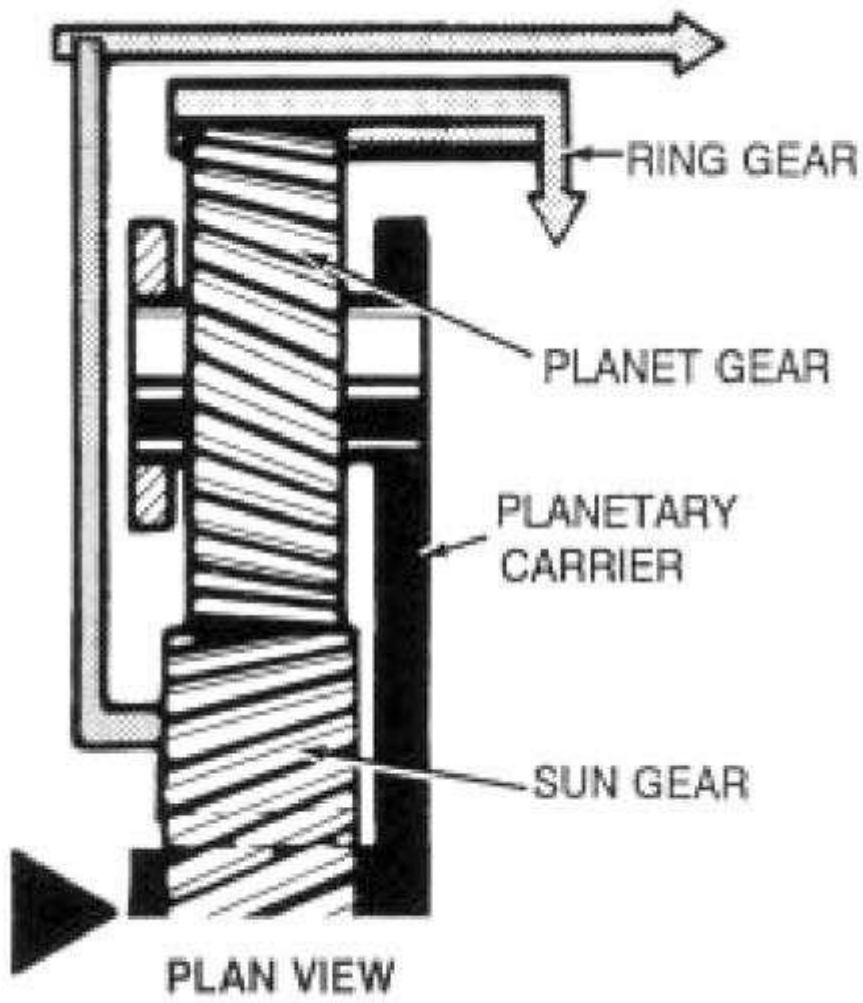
Identifying Cross Section View Of Double Planetary Set
